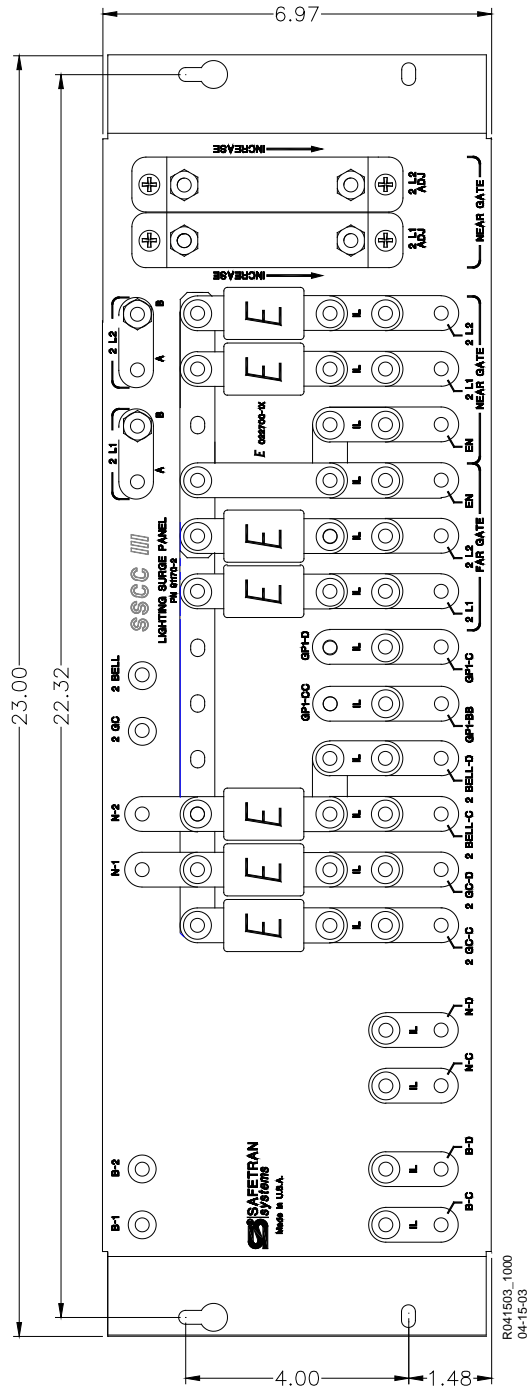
SSCC III Lighting Surge Panel Mounting Dimensions
